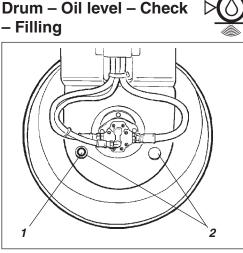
Drum, vibration side 1. Oil plug 2. Check hole
